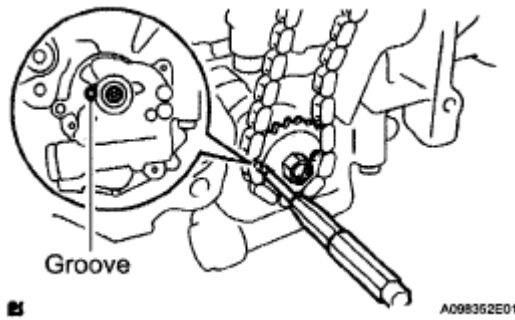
Adjusting Hole Of Oil Pump Drive Shaft Gear To Lock Gear
